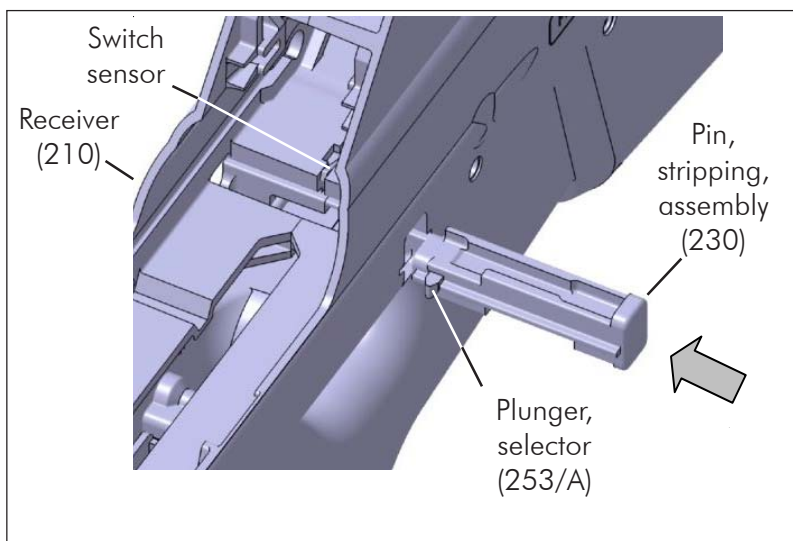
ac - Reassembly of the pin, stripping, assembly (230)
